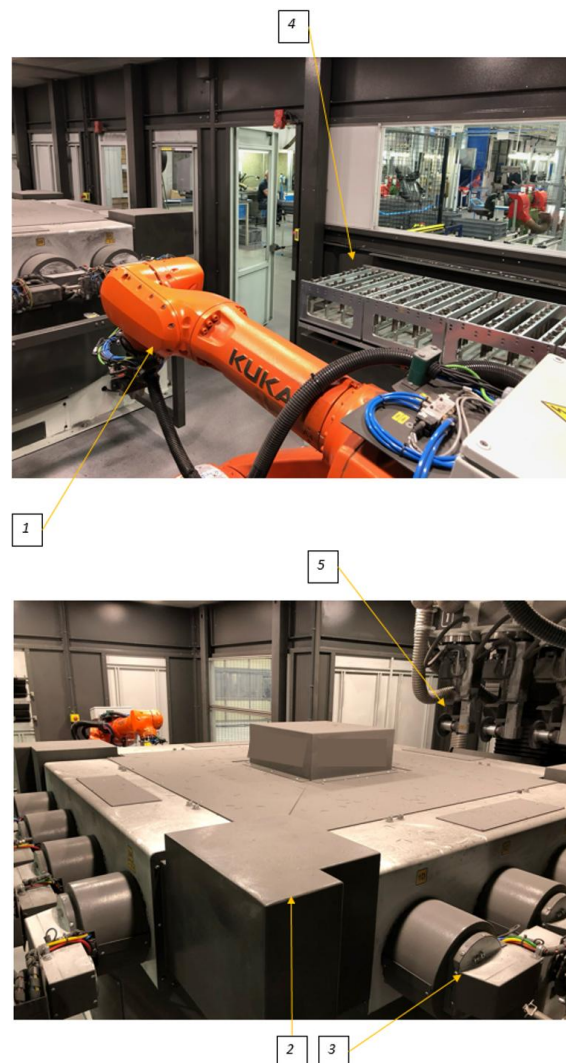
Work station (1 - industrial manipulator, 2 - rotary table, 3 - workpiece gripper, 4 - workpiece magazine, 5 - tool holder)
